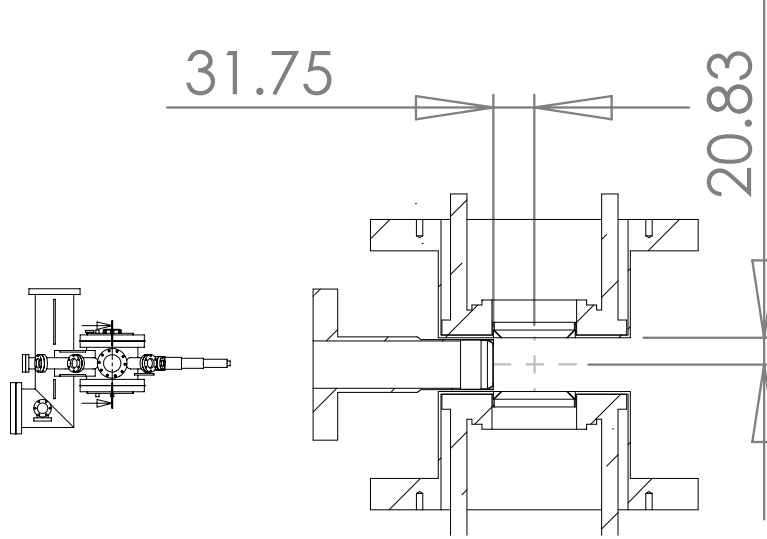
Section view of the main chamber, depicting positioning of top, bottom and side bucket windows. Side bucket is designed to fit with 1mm of clearance. High current magnet coils are shown, along with their mounting rods, in the top and bottom buckets. Dimensions are mm.
